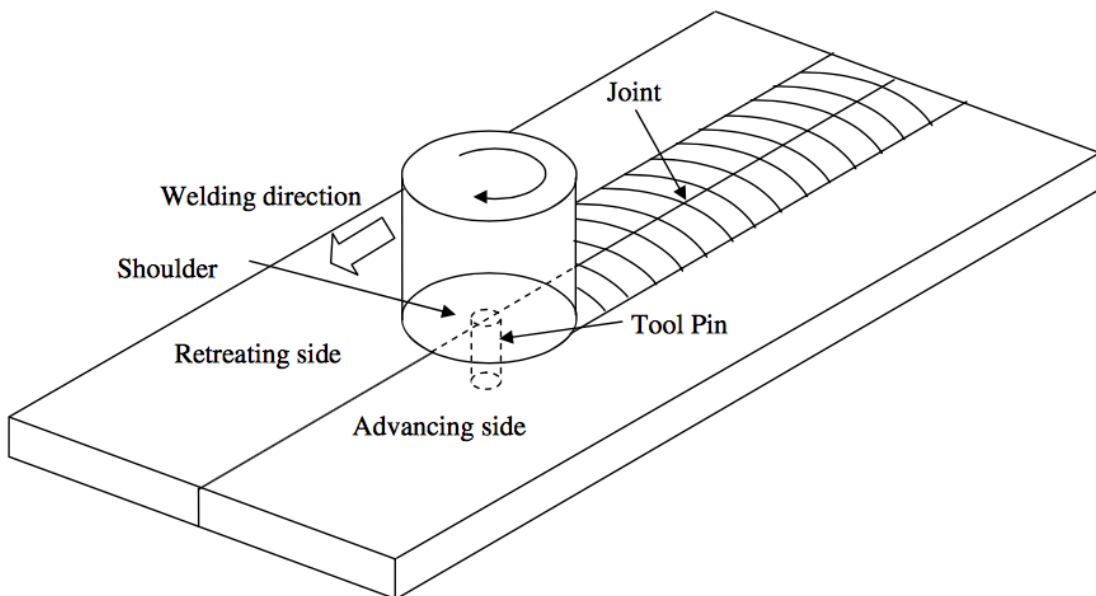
Schematic of friction stir welding process showing advancing and retreating side
